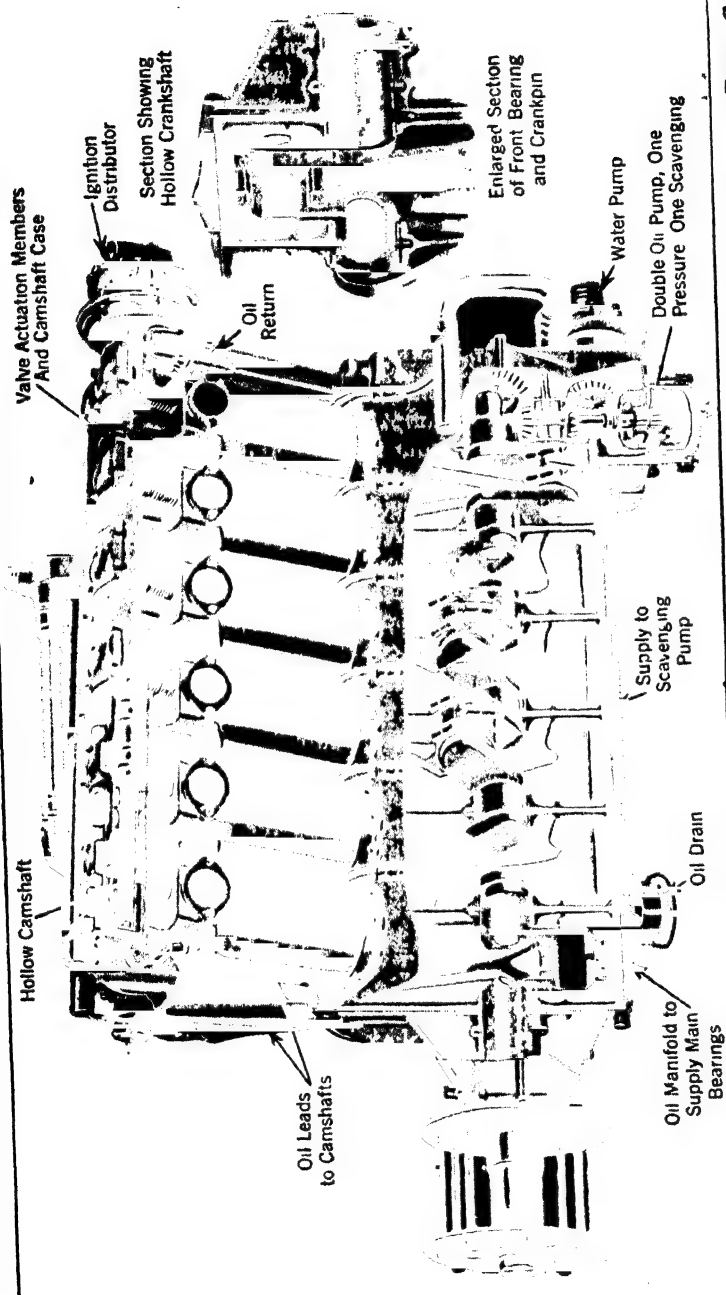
Oiling System of the "Liberty" Aviation Engine Operated on Dry Sump Principle, Oil from the Pressure Pump Going to Bearings and Camshaft, the Oil Spray Thrown Off by the Crankshaft Lubricating Interior Walls of the Cylinder and Other Parts. Suction or Scavenging Pump Draws All Oil from the Crankcase.
